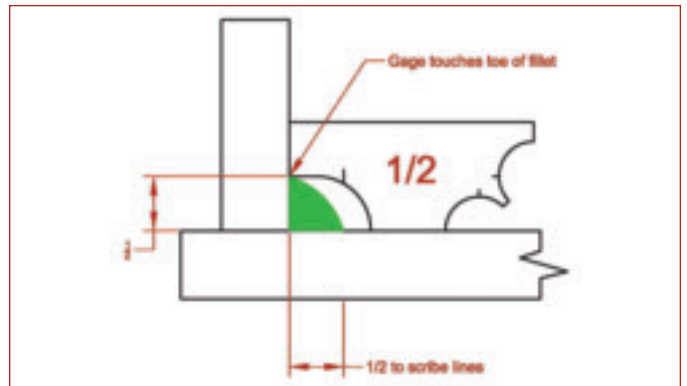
Convex fillet weld size is the same as the fillet weld gauge.
